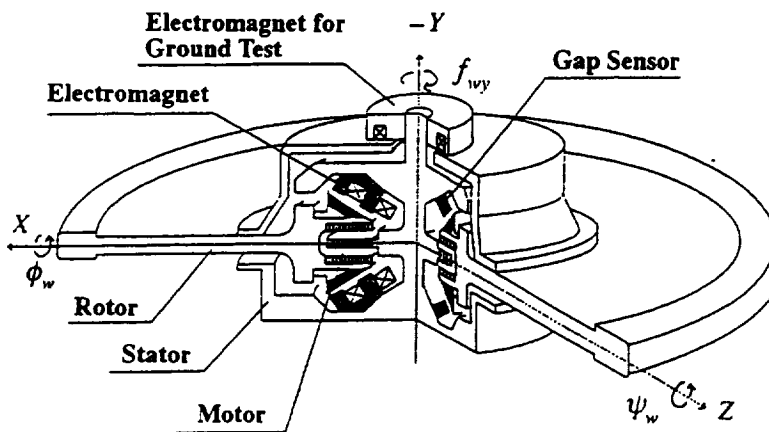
Cross section of Octa-Electromagnet-Type Active Magnetic Bearing Momentum Wheel
